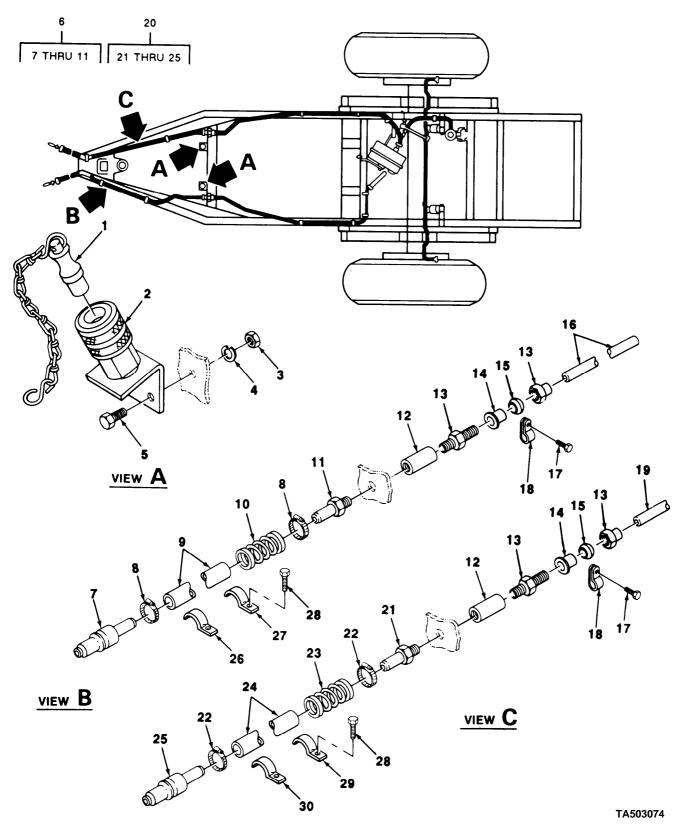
VACUUM HYDRAULIC BRAKE SYSTEM HOSE ASSEMBLY (M105A2C),
